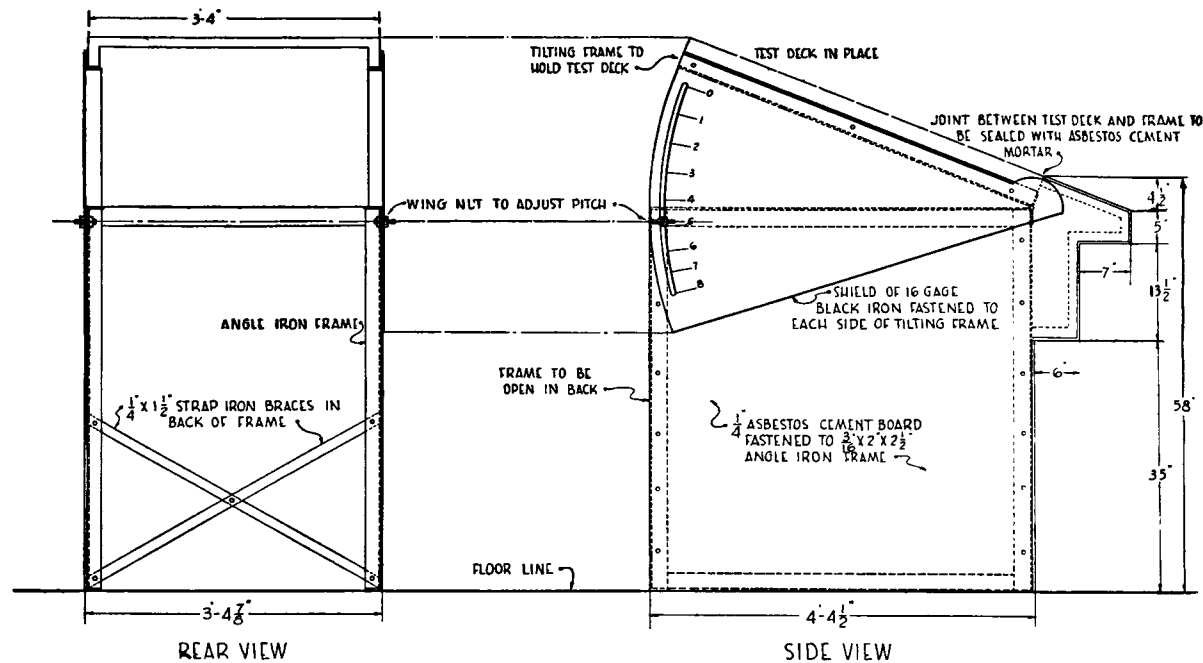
Detail of Tilting Frame to Hold Test Roof Deck.
